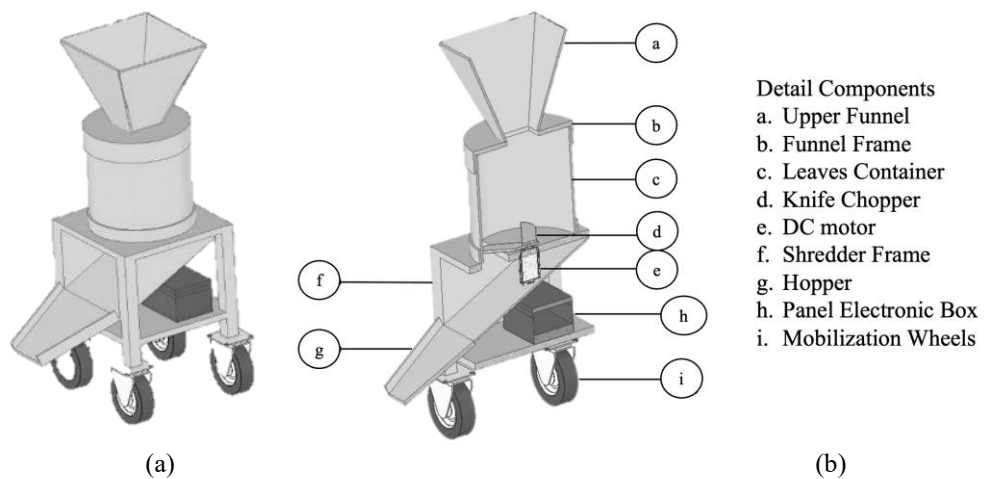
Design Waste Shredder Machine (a) Full Body and (b) Detail Components
